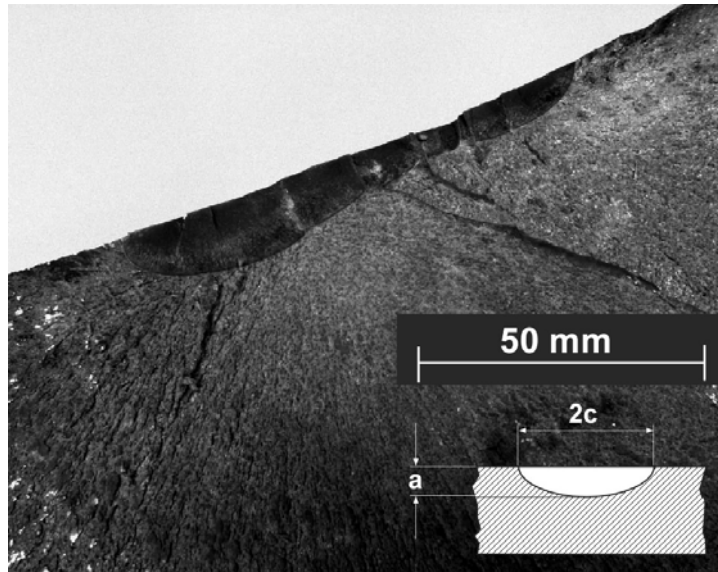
Fracture surface of the broken wobbler. The cleavage fracture event had its origin in a shallow fatigue crack at the surface.
